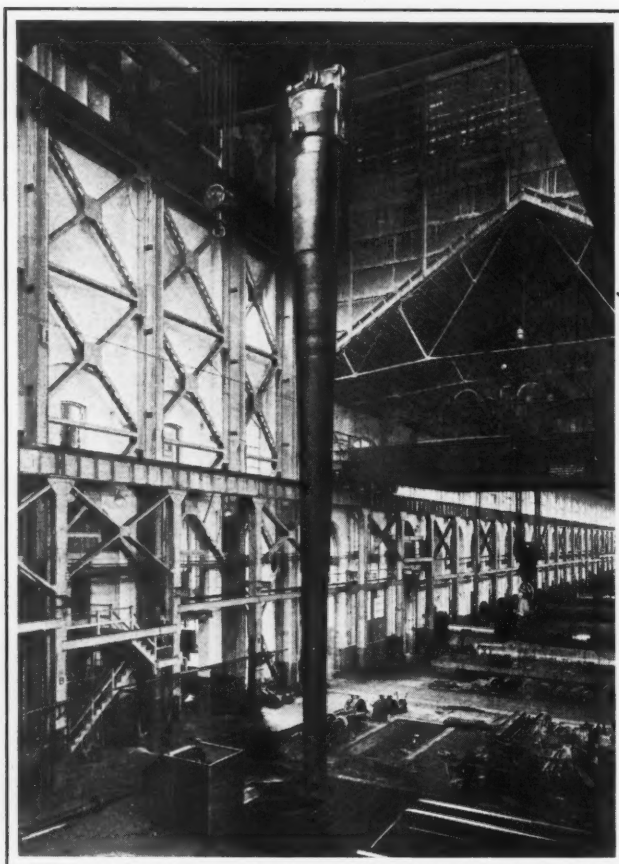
Lowering a 16-inch Gun into the Electric Heating Furnace
